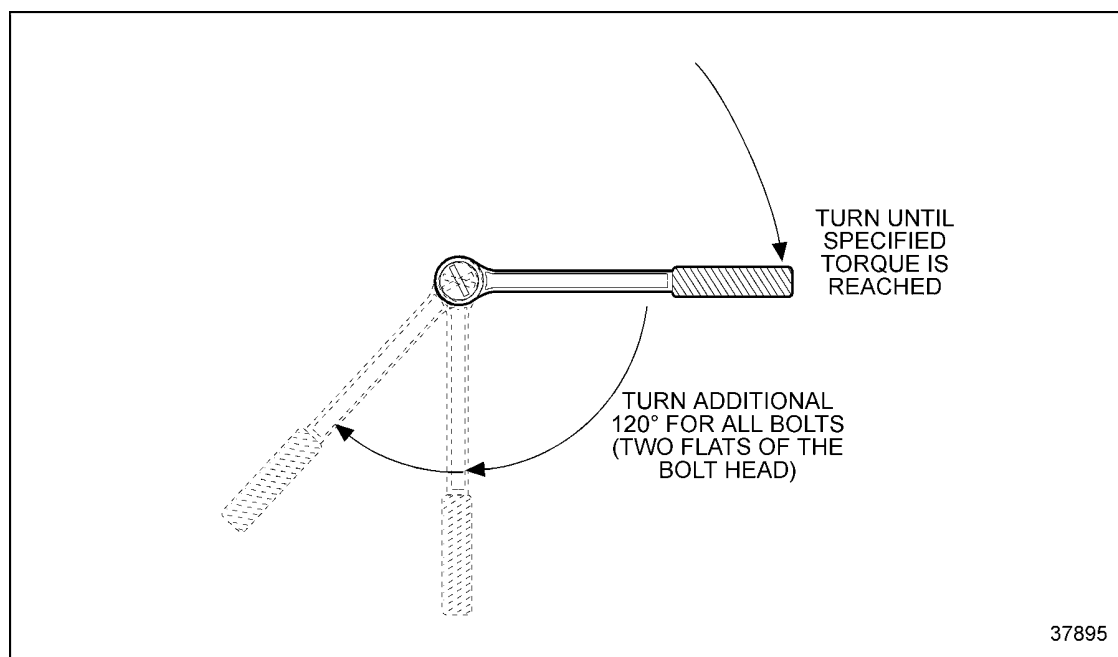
Torque Turn Limits — Camshaft Drive Gear-to-Camshaft Bolts
